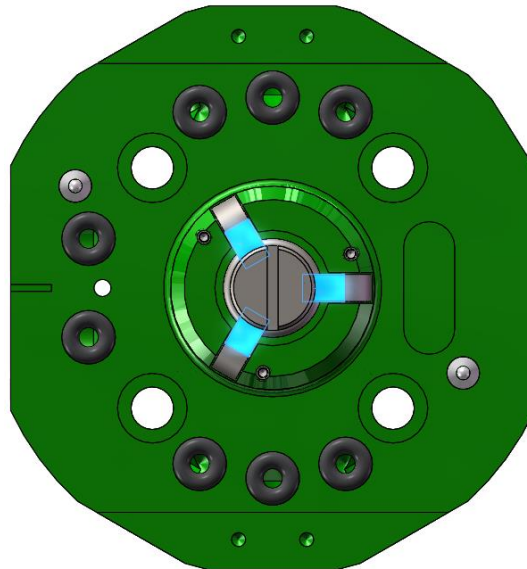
E50 Robot Side Lubrication – Cams & Driver
